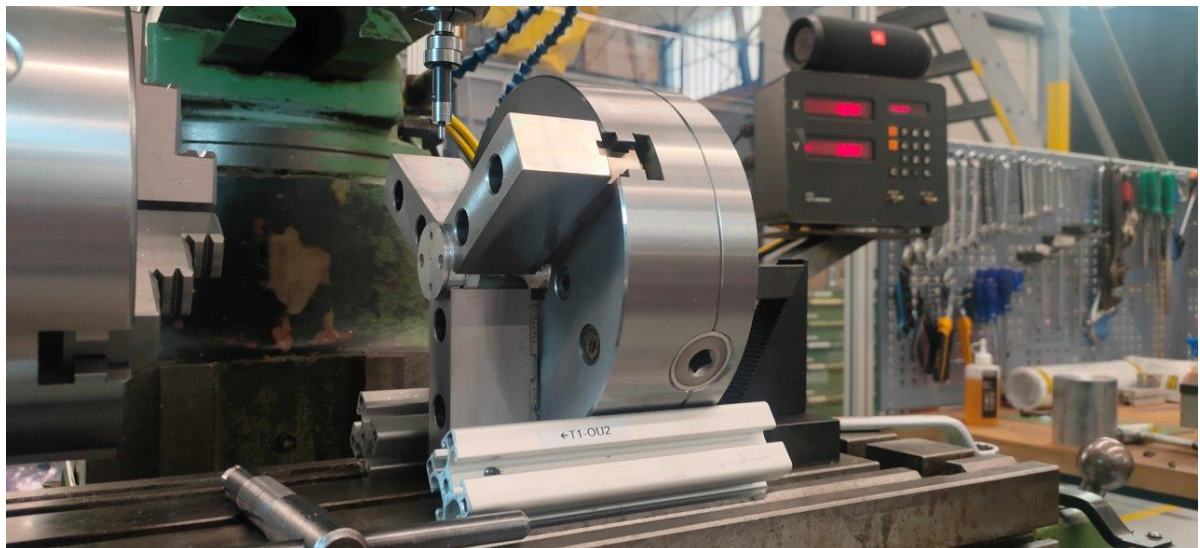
Vertical clamping setup of chuck on the mill bed.
